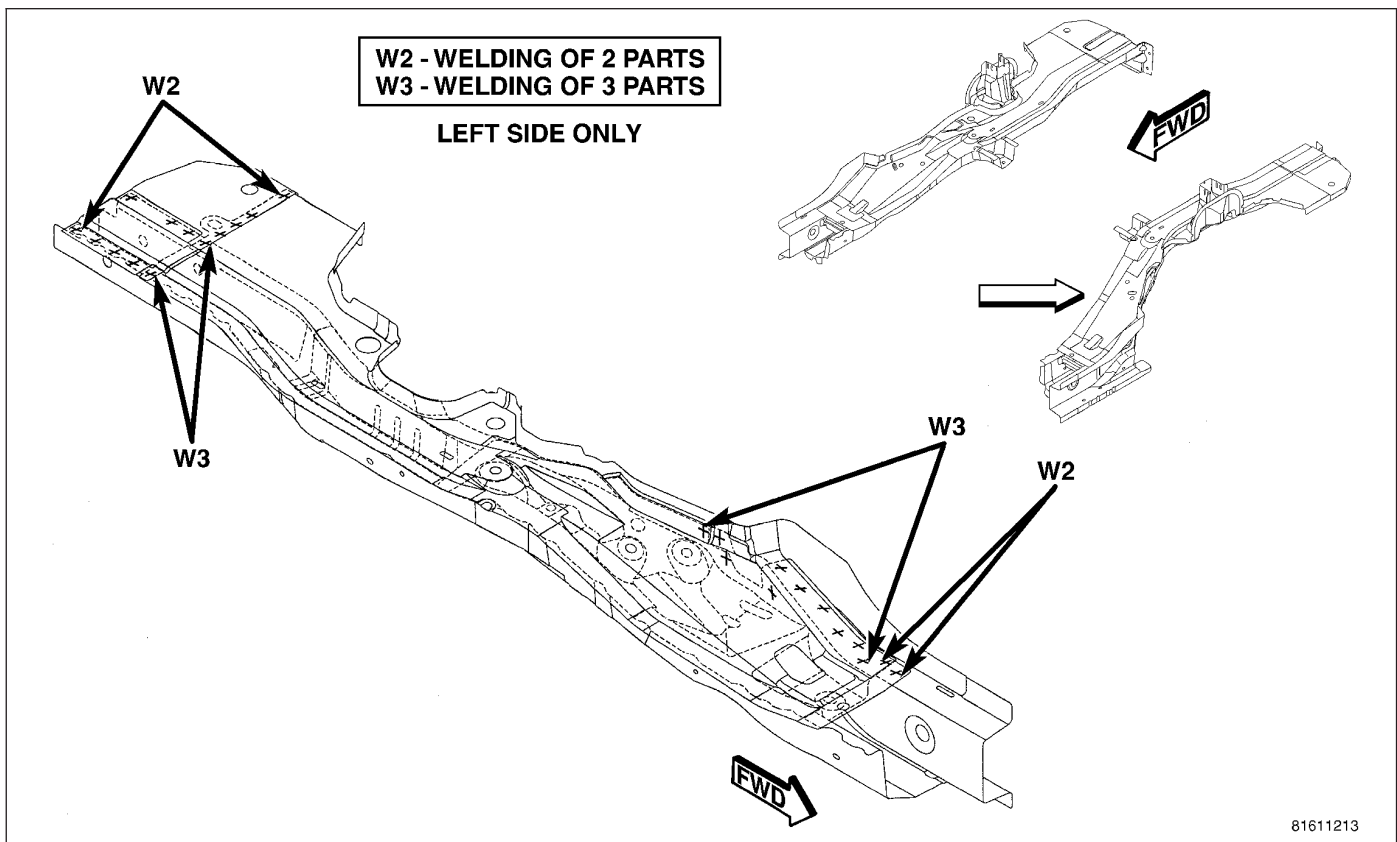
SIDEMEMBER ASSEMBLY (15 OF 17)
